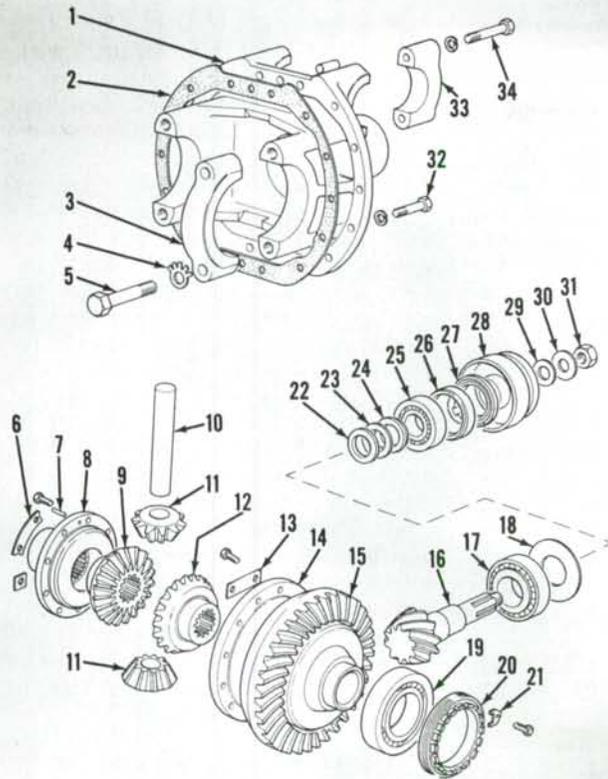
Exploded view of David Brown differential assembly showing component parts and their relative positions.
